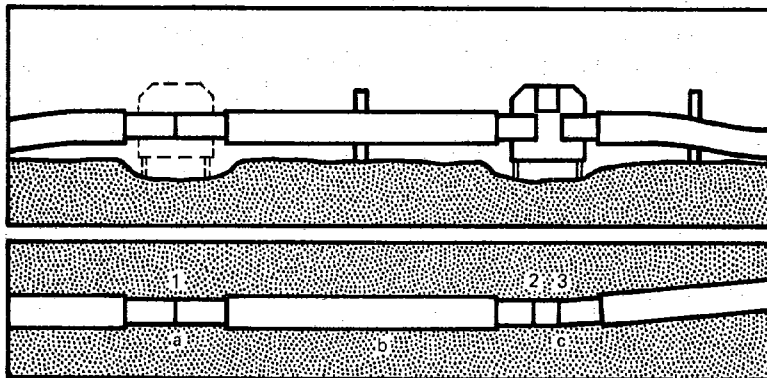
Principle of hyperbaric welding repair with one bias cut
